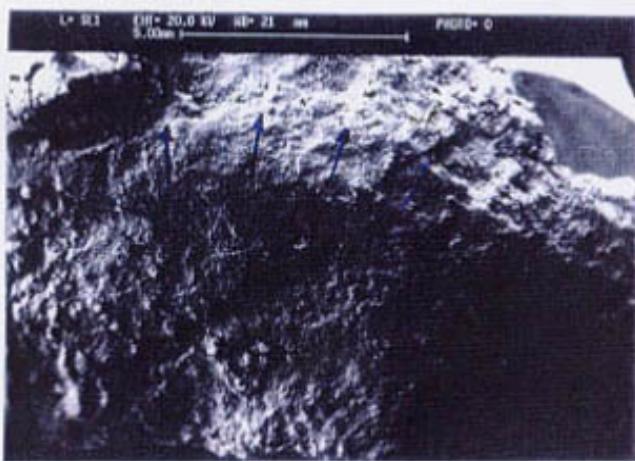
Fatigue bench marks and striations at crack in fig. 28
